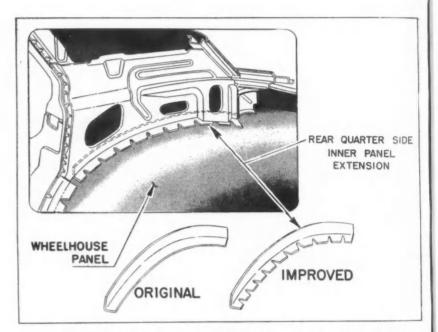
Notched flange for improving assembly of rear quarter side inner panel extension to wheelhouse panel.
